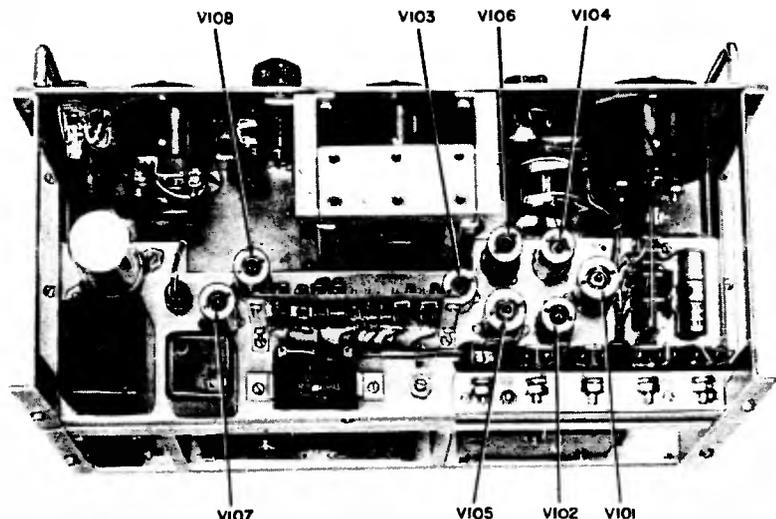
Test Set Subassembly TS-687/TRM-1, Tube Locations
